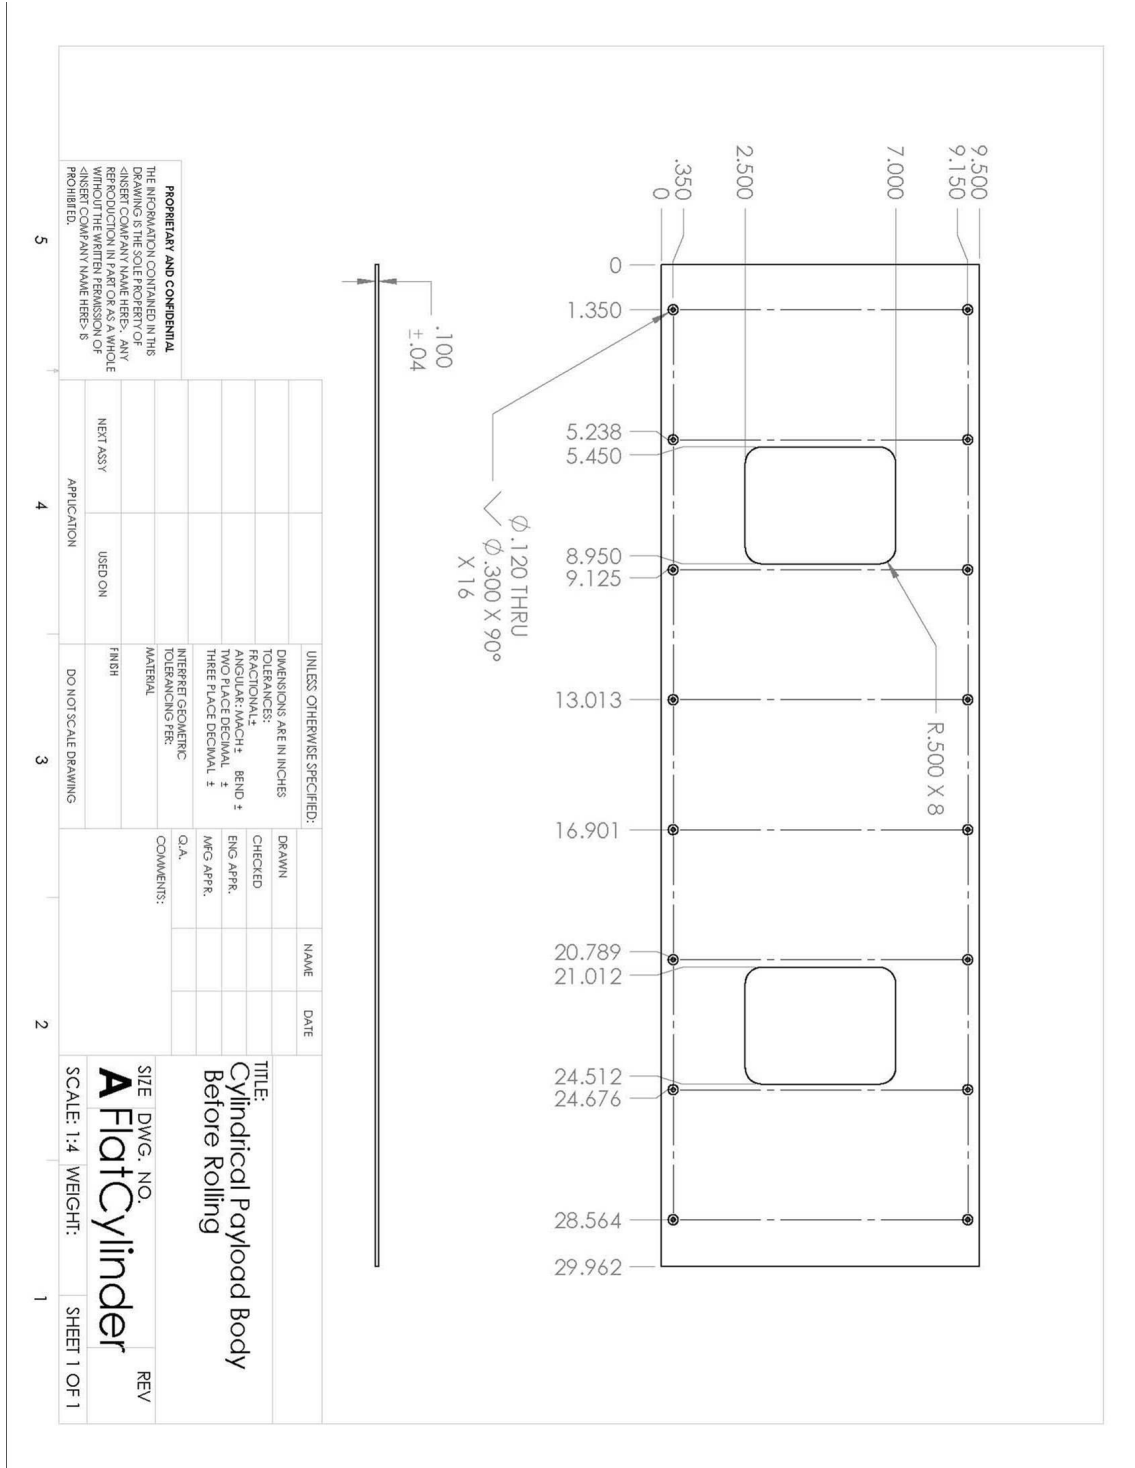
RockSat Skin Mechanical Drawing – 0.125” thick
